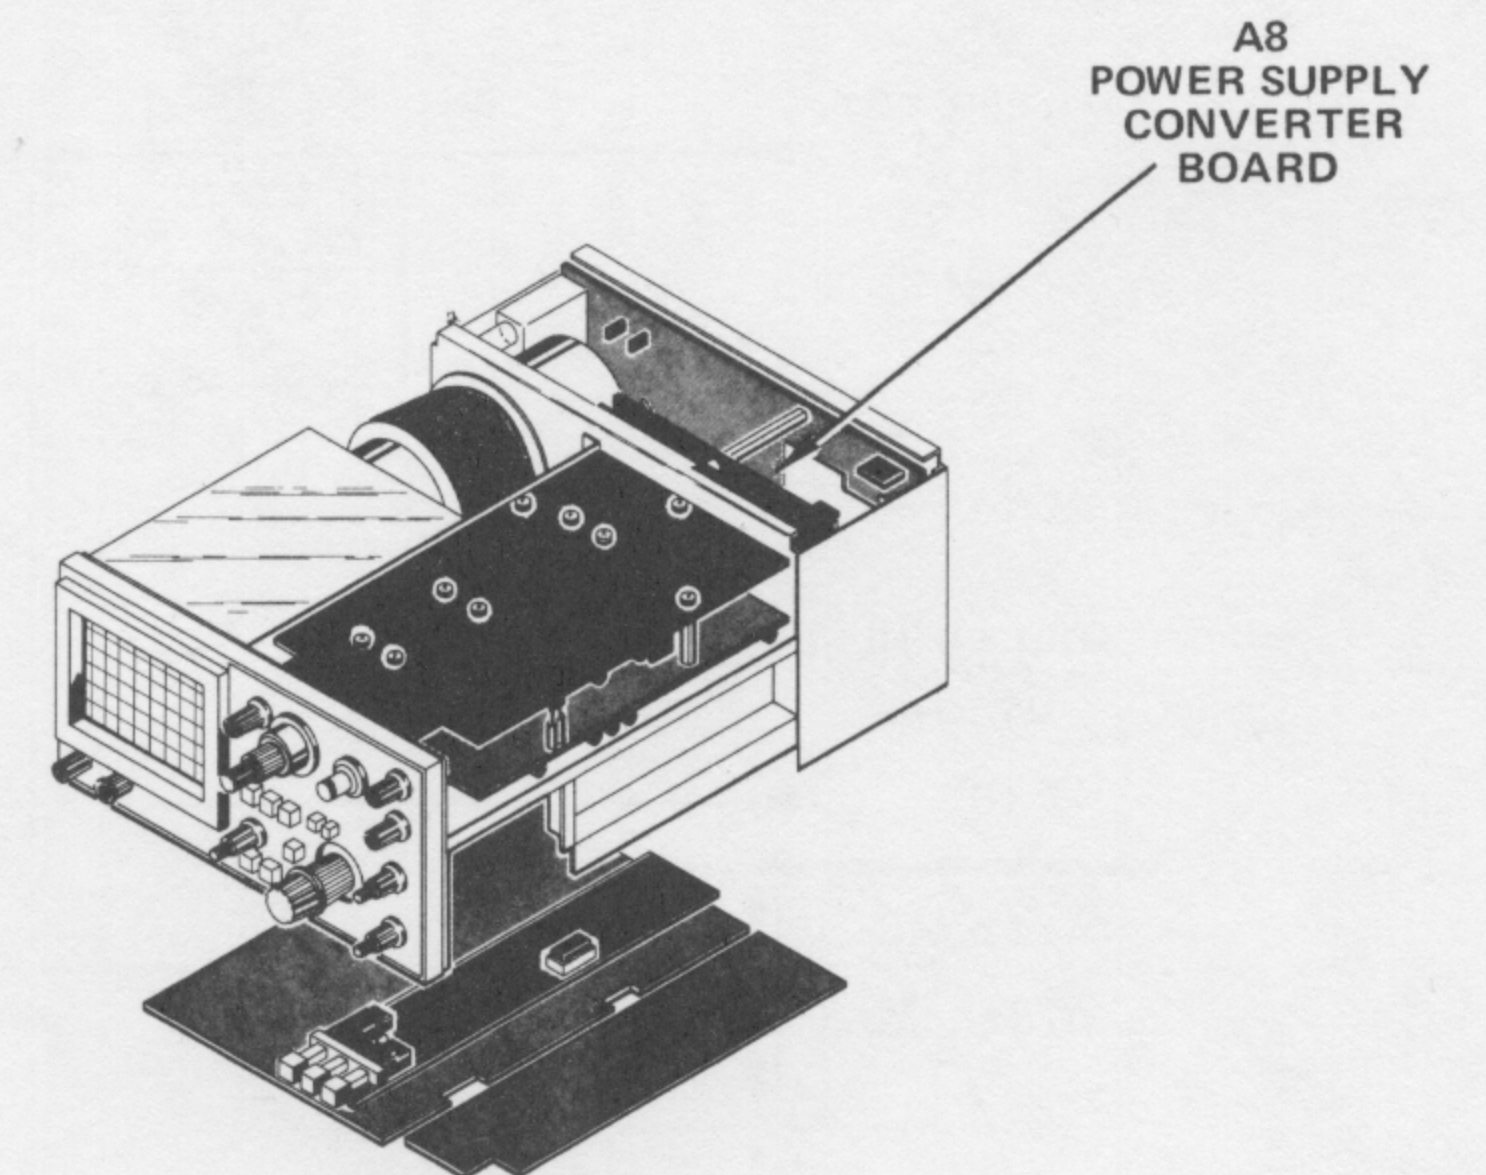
A8 Power Supply Converter board component locations, below SN 300216.
